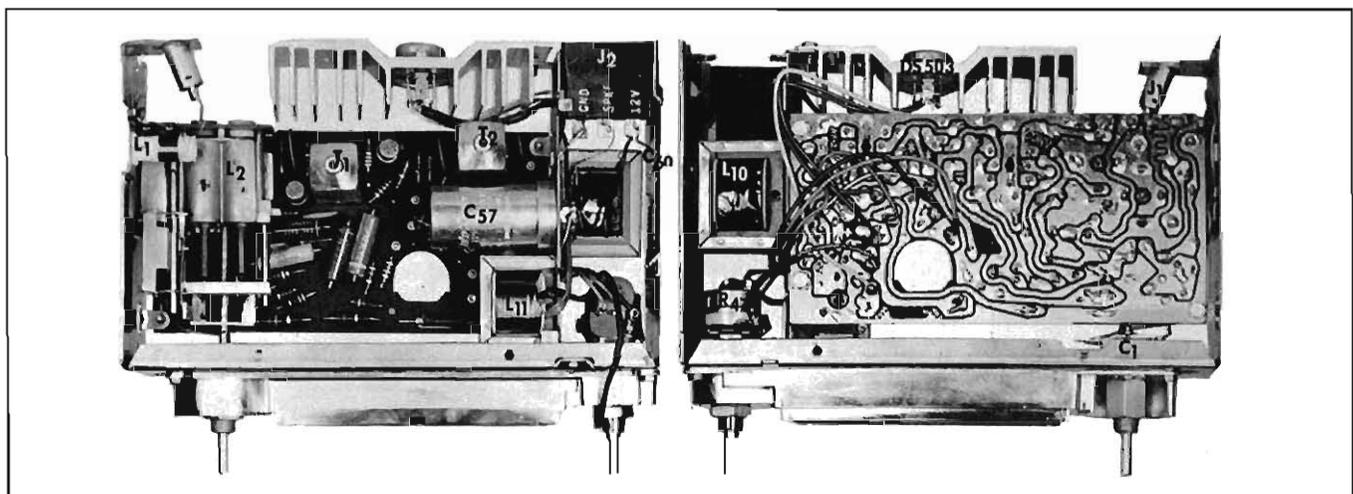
CORVAIR 95 PARTS LAYOUT - CIRCUIT BOARD VIEW - 986330 - RADIO
